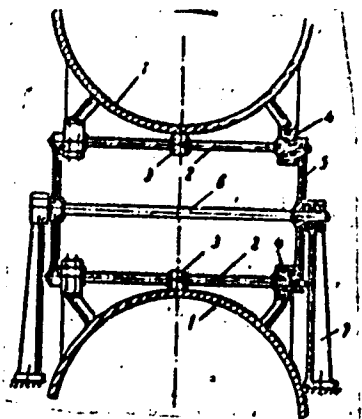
1- tubes; 2- torsion bars; 3- split clamps;
